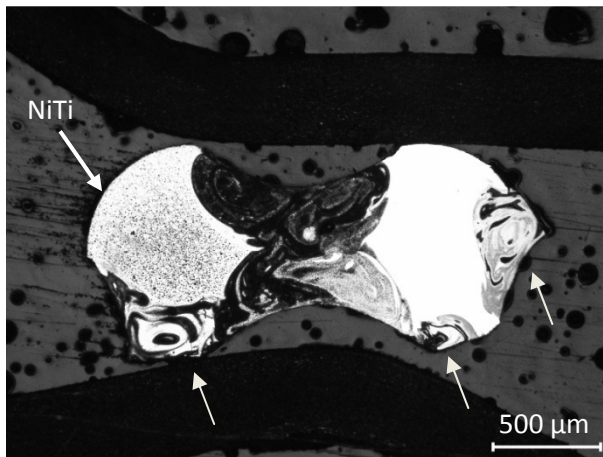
Macrograph of the dissimilar NiTi/AISI 316LN lap joint showing the welded zones and identifying the NiTi side
